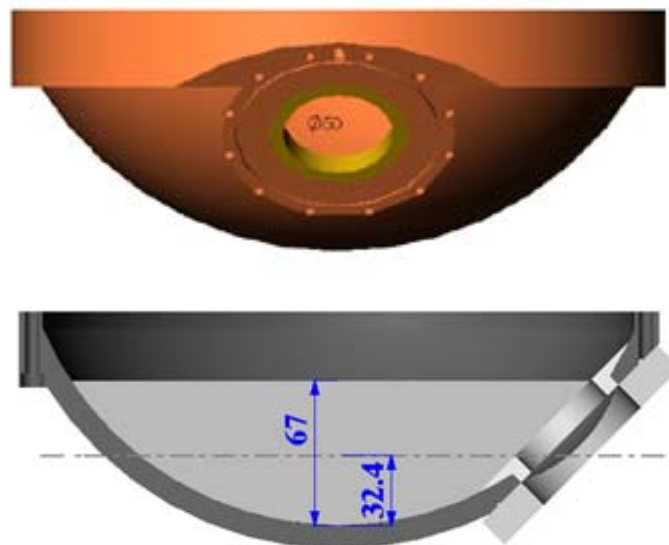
Lower head with lateral hole with 50 mm diameter
